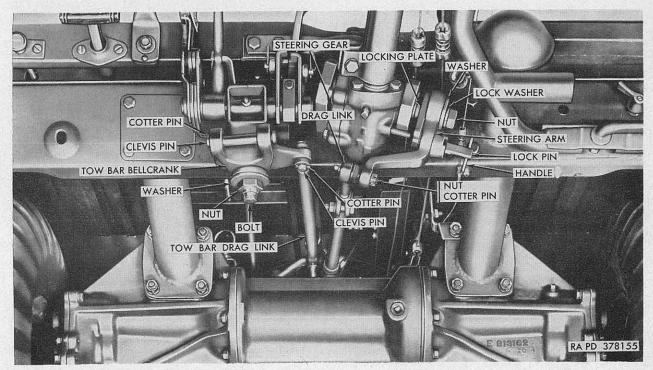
Steering gear and arm showing lockpin pulled out to disconnect steering arm from locking plate.
